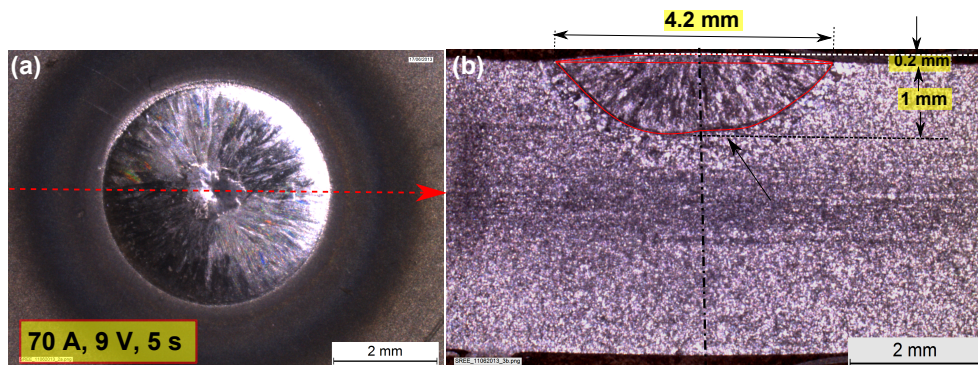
Transverse macrograph of the static GTA weld indicating the fusion zone size and shape for AISI304L material with 26 ppm sulfur content (a) Top view (b) cross sectional view
